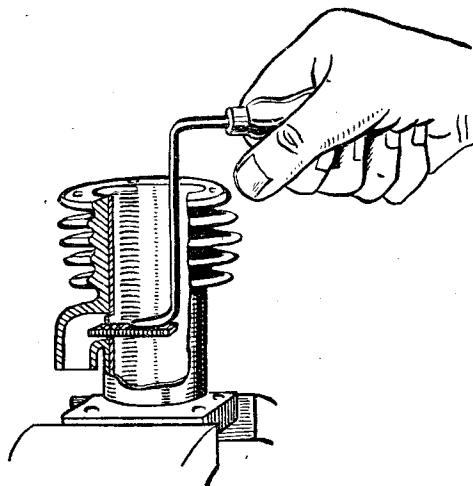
A piece of file soft-soldered to a length of rod used for filing a cylinder sleeve
